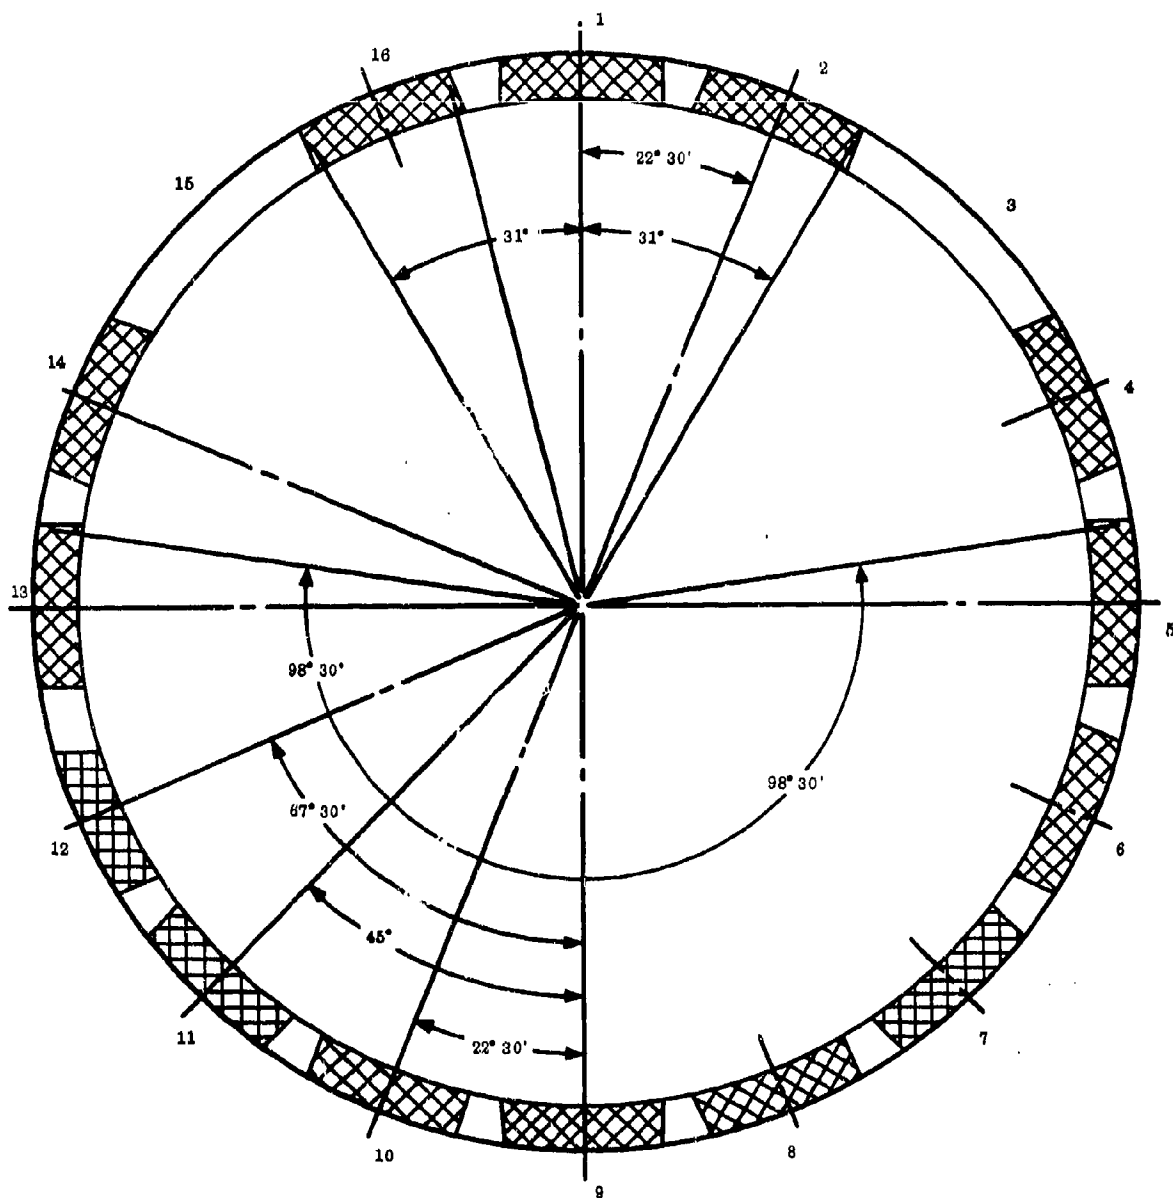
BOX TRANSLATION AND RADIAL MOUNTING
